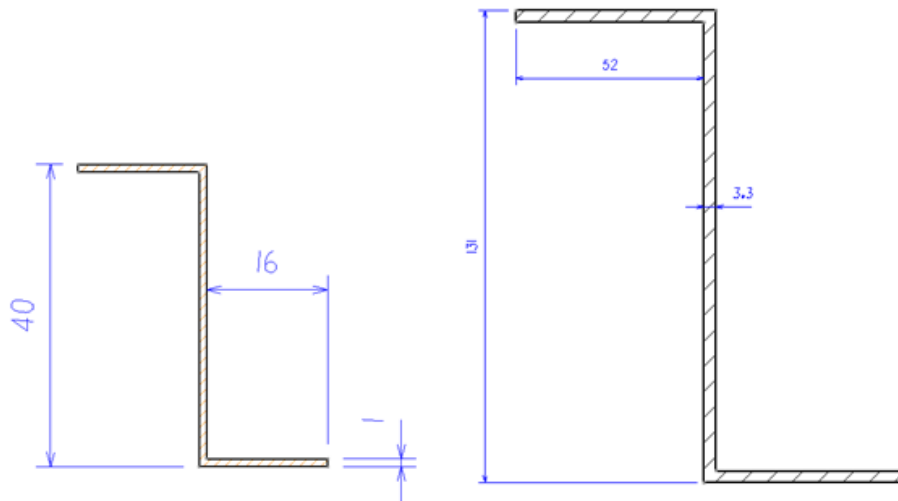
Basic dimensions for FW-11 cabin stringers
